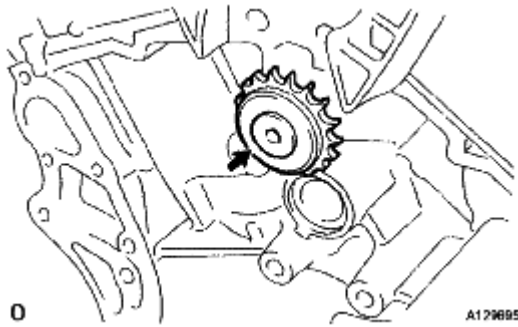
Locating Idle Gear Shaft No. 2, Idle Sprocket And Idle Gear Shaft
